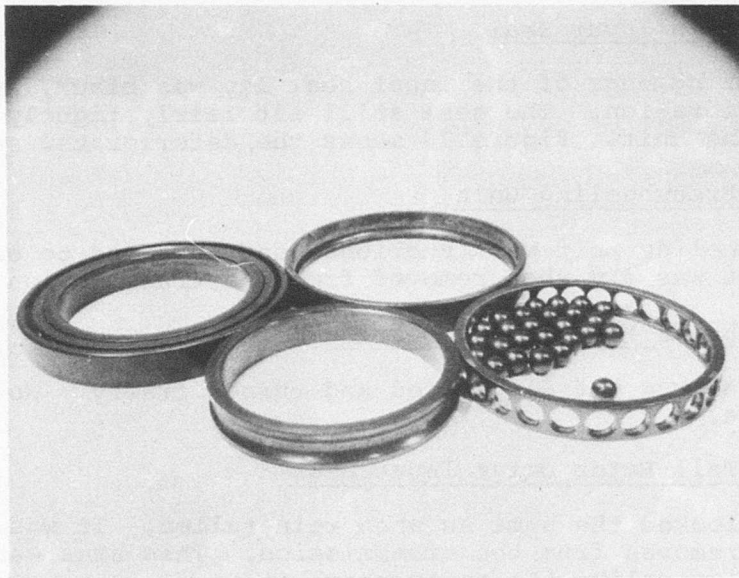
Input gearshaft duplex bearing following 4.0-hour emergency lubrication run.
